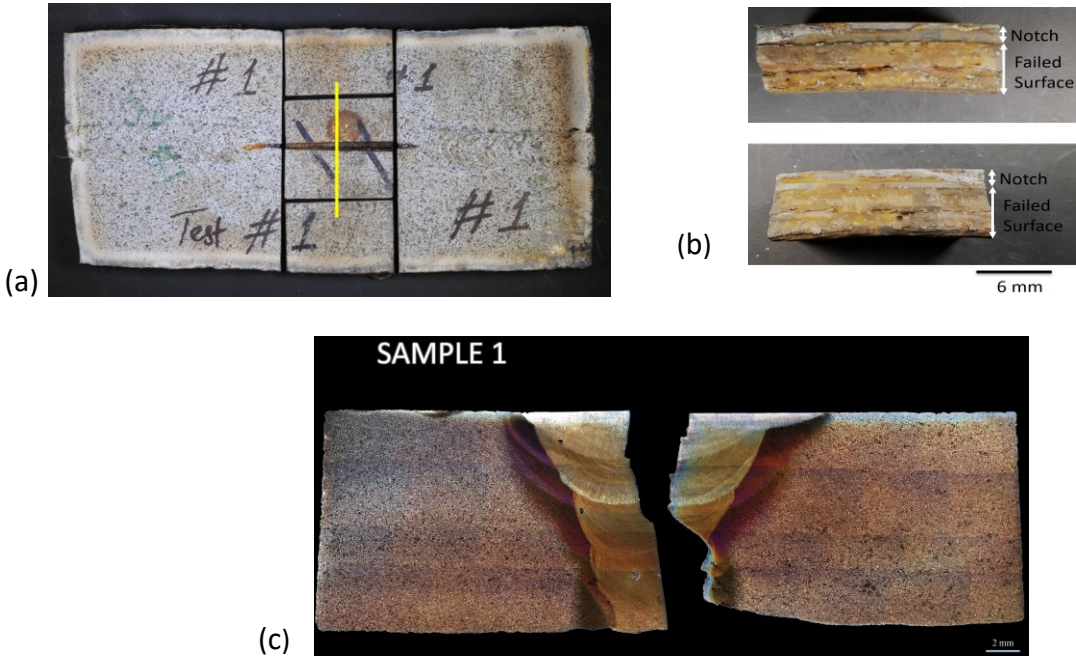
Sample 1 fracture analysis result (a) sectioning (b) the notch and failed surface and (c) the fracture crack path
